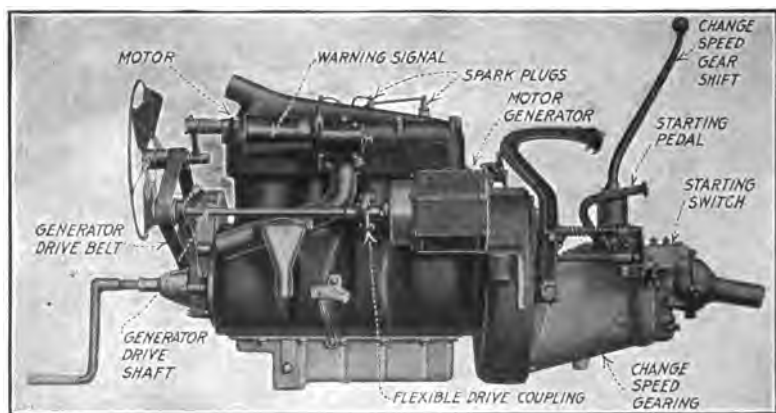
How the Simms-Huff Motor-Generator is Installed on the Maxwell Engine.
